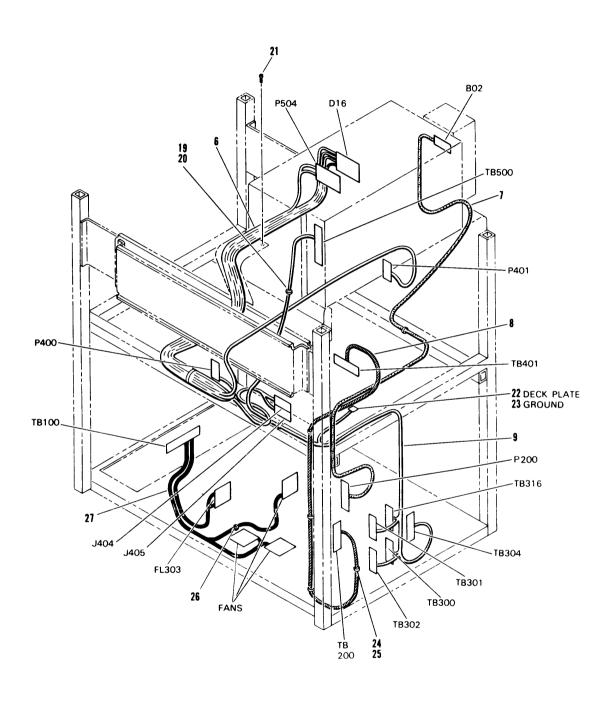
DRIVE CABLE ROUTING ASM (SHEET 2 OF 2)
